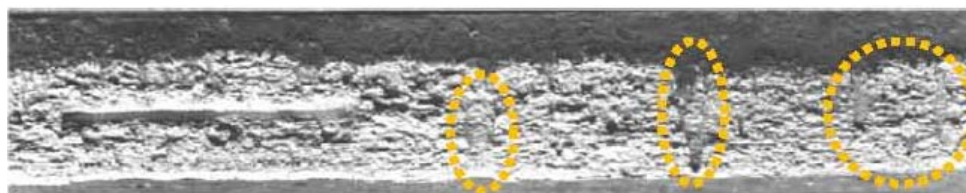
View illustrating the look of a penetrator or pinhole (below a PTW cold weld)
